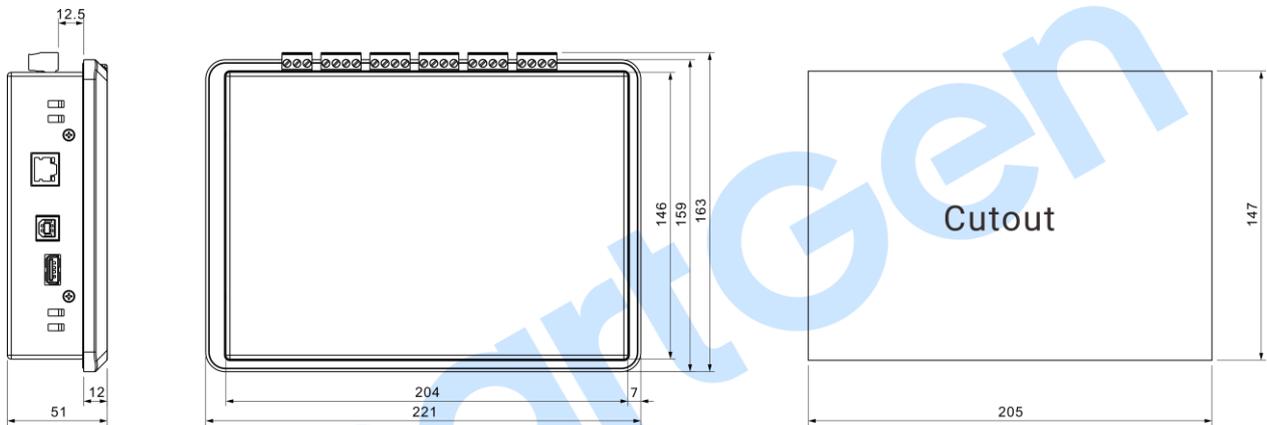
HMU8-CHP Case Dimensions and Panel Cutout
